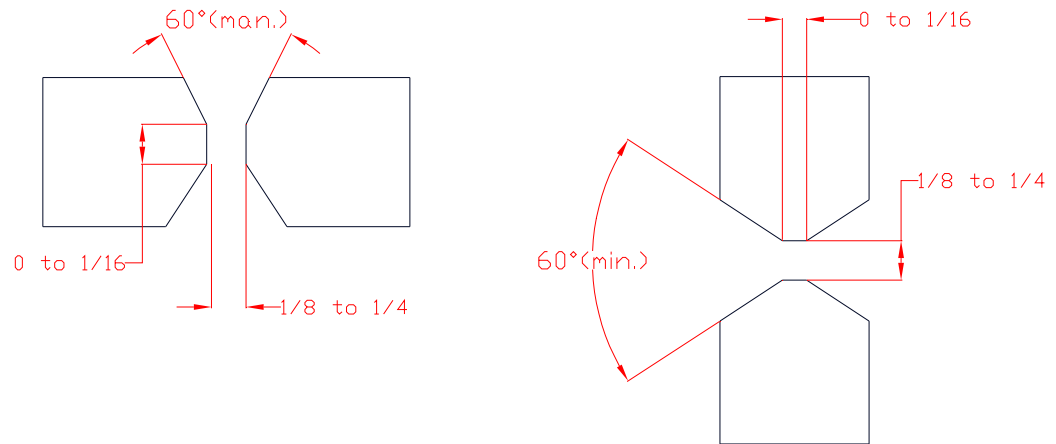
Double-V groove joints for welding both sides.
